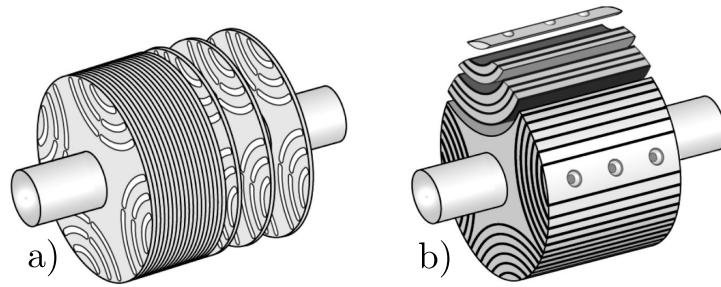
a) Transversally laminated rotor (TrLam) and b) Axially laminated rotor (AxLam) [50].
